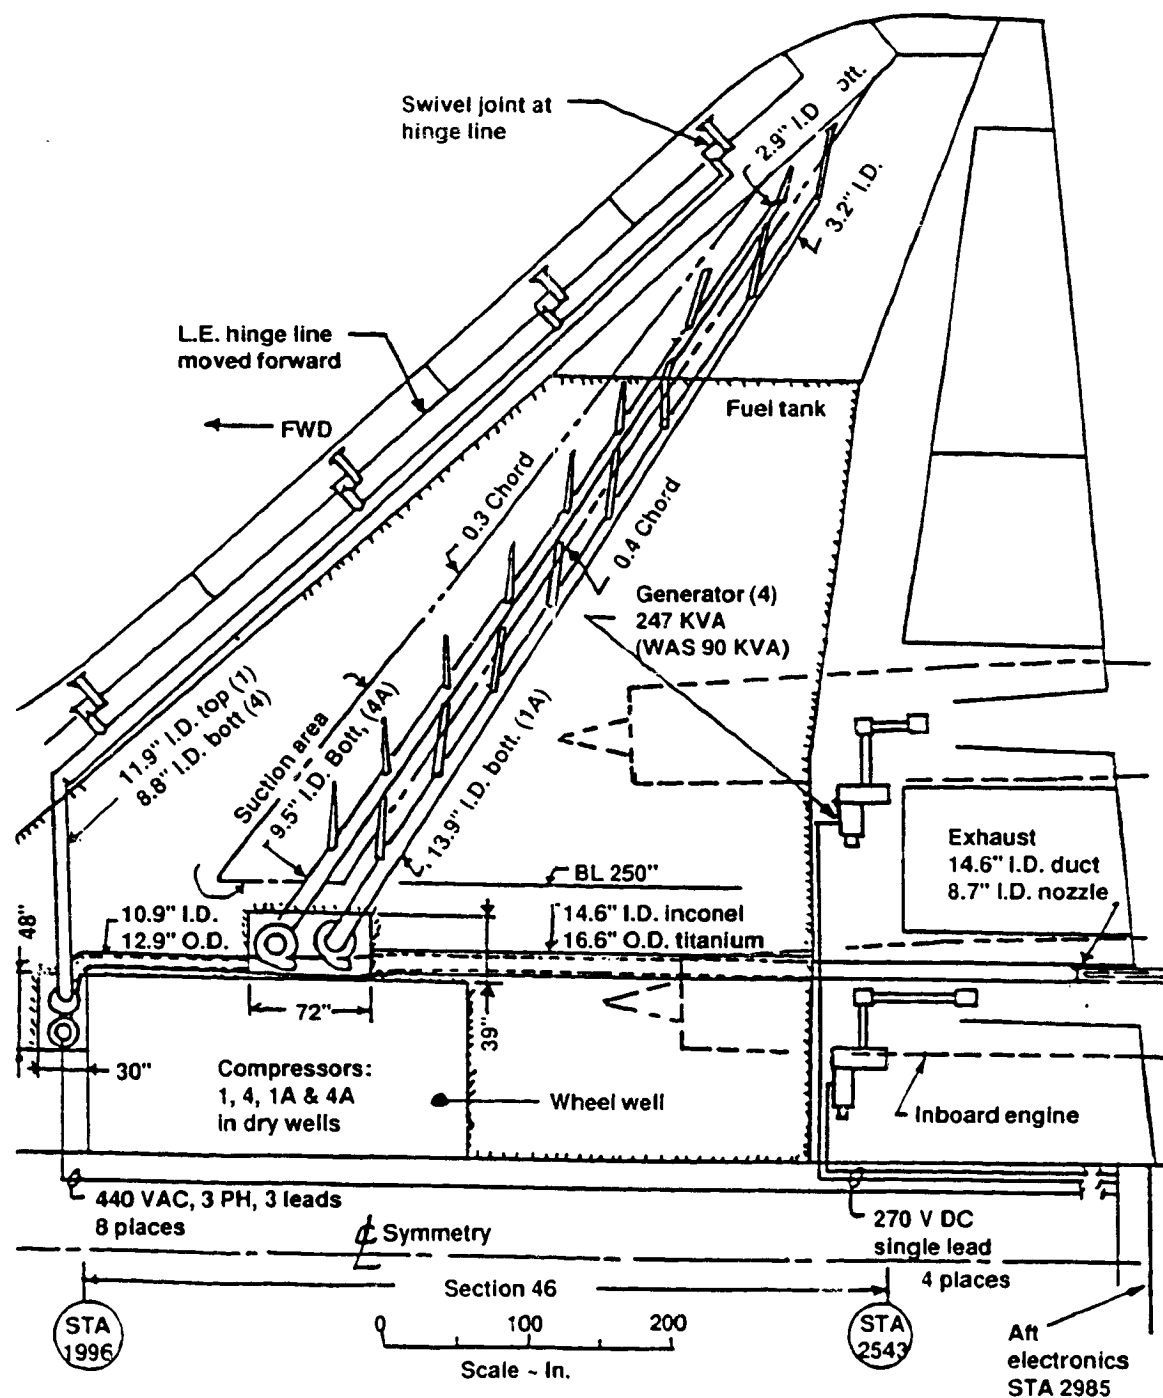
Outboard Wing HLFC (Scheme 1) Electrical Compressor Drive
